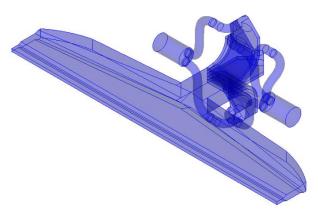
Geometry of a five-layer sheet die with only two entrances.
